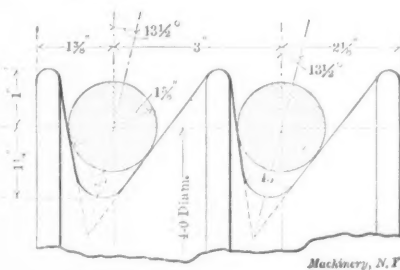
Shape of Grooves for Rope Drive in Fig. 2.
